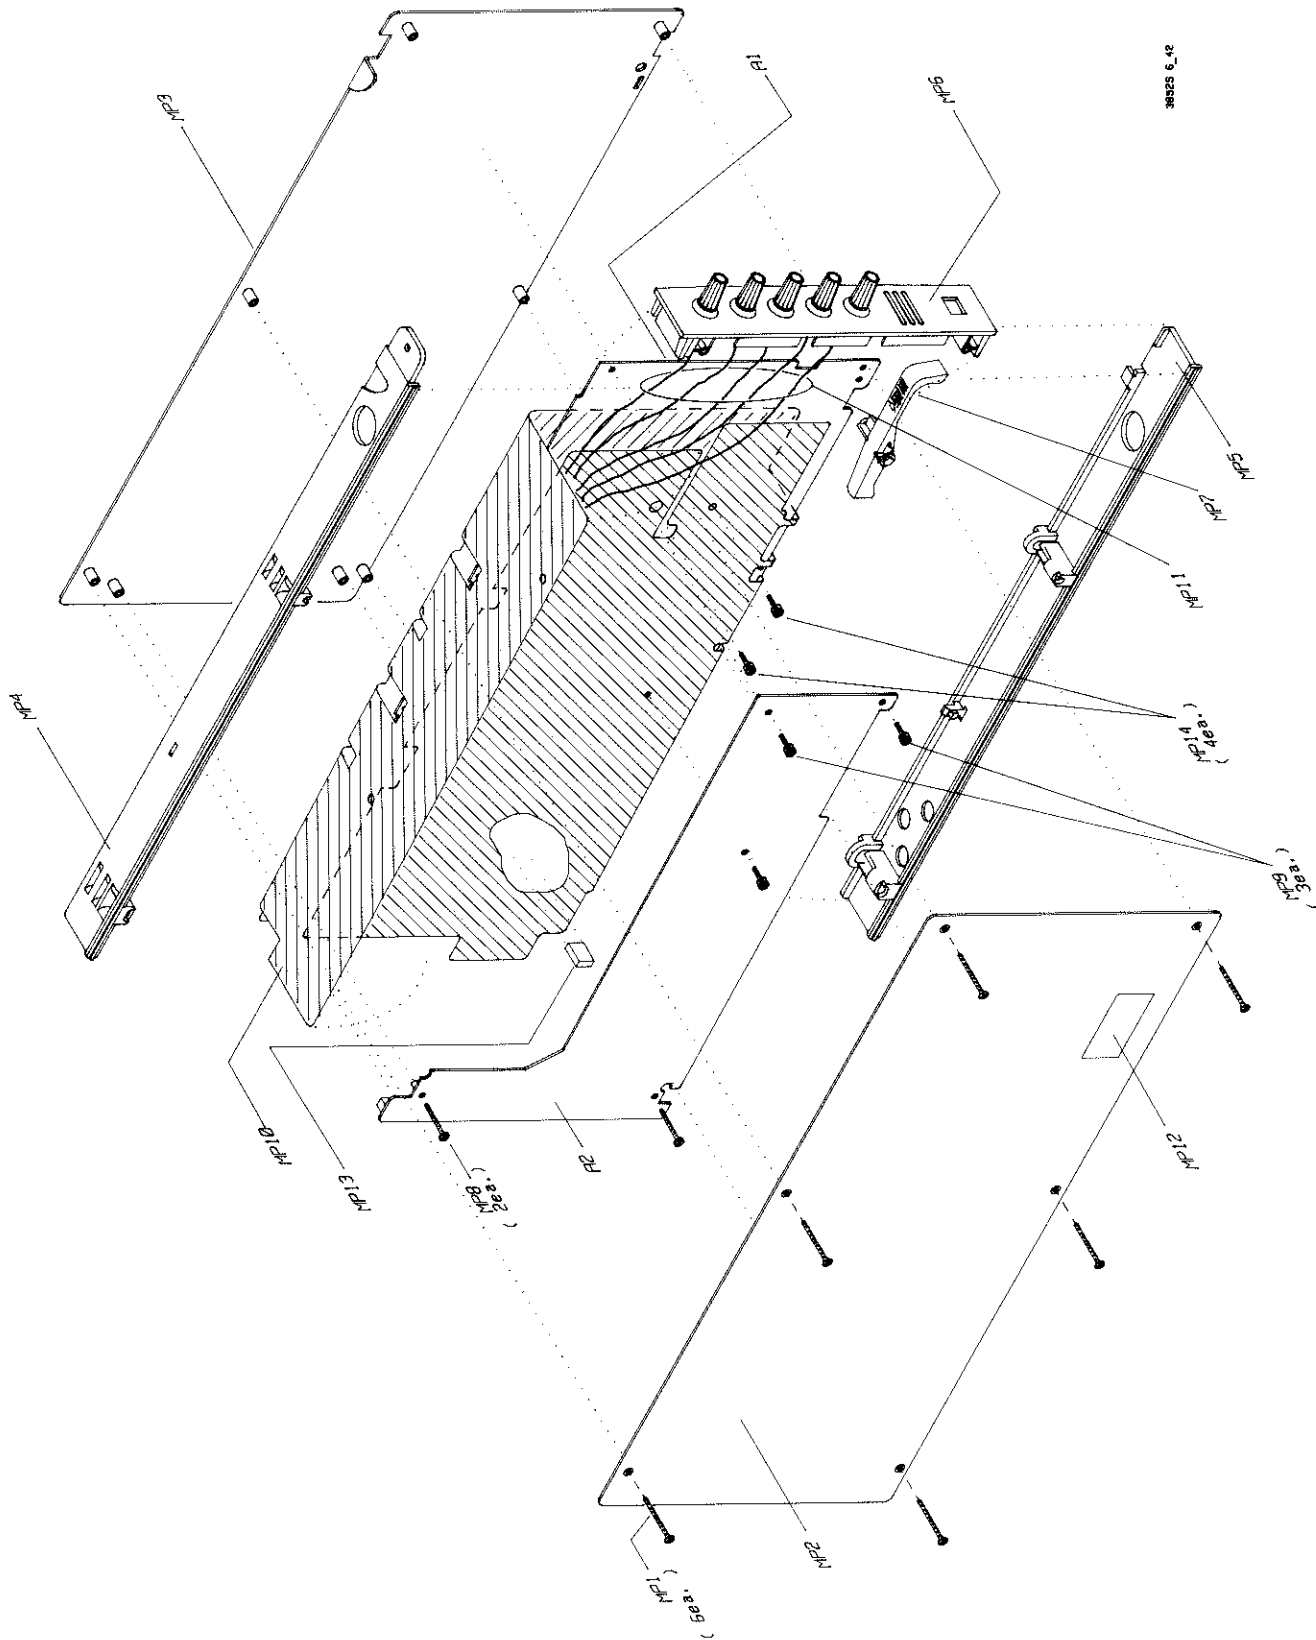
shows the mechanical breakdown of the HP 44701A. This figure also provides assembly and disassembly information. The parts in Figure 6-10 are keyed to the parts list in Table 6-12.
